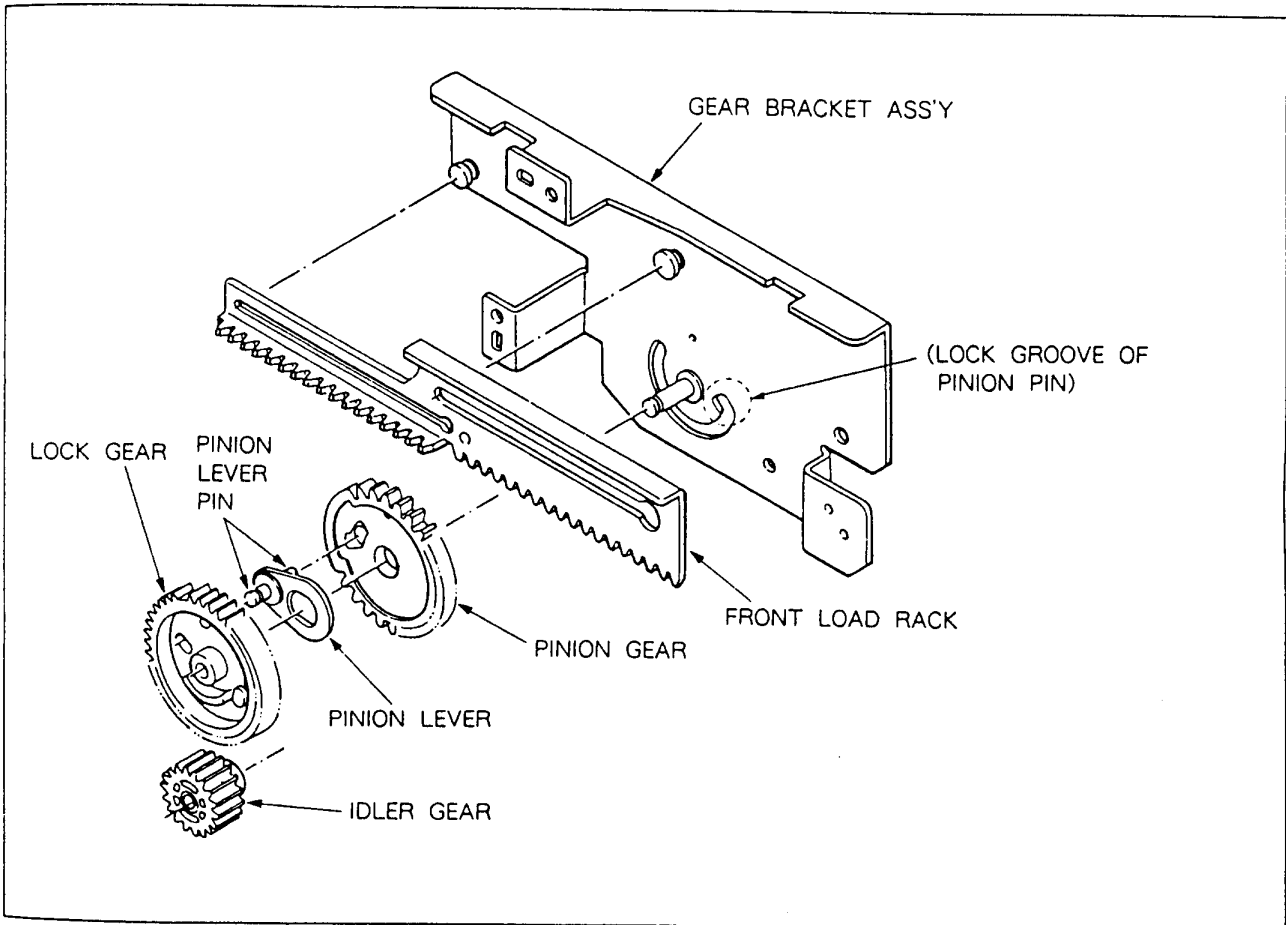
RACK LOADING MECHANISM OF CASSETTE HOLDER
